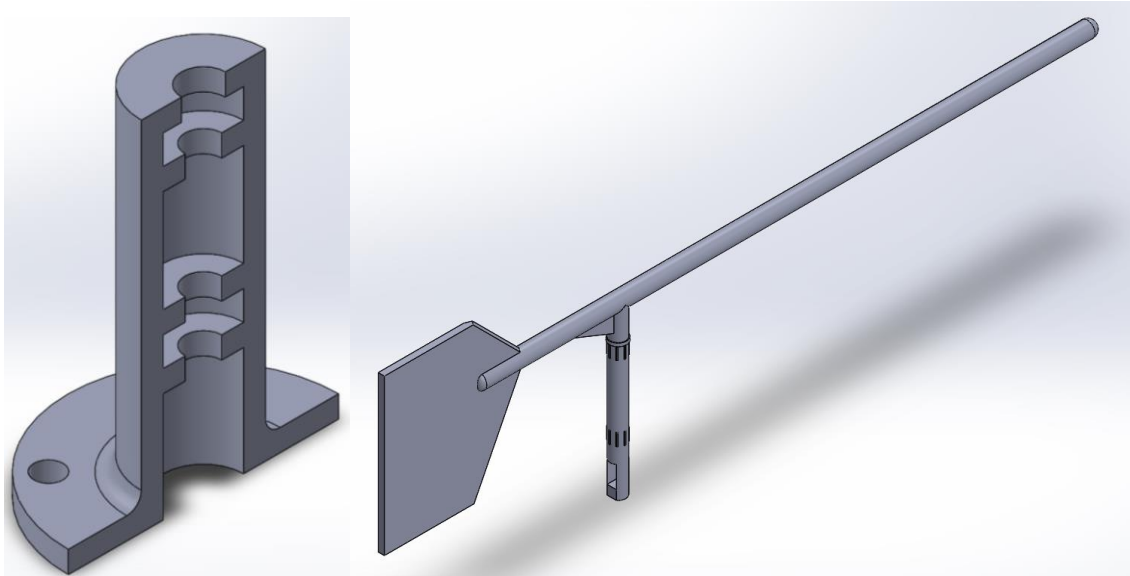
3D Models of the Bearing Housing (left) and Wind Vane (right)
